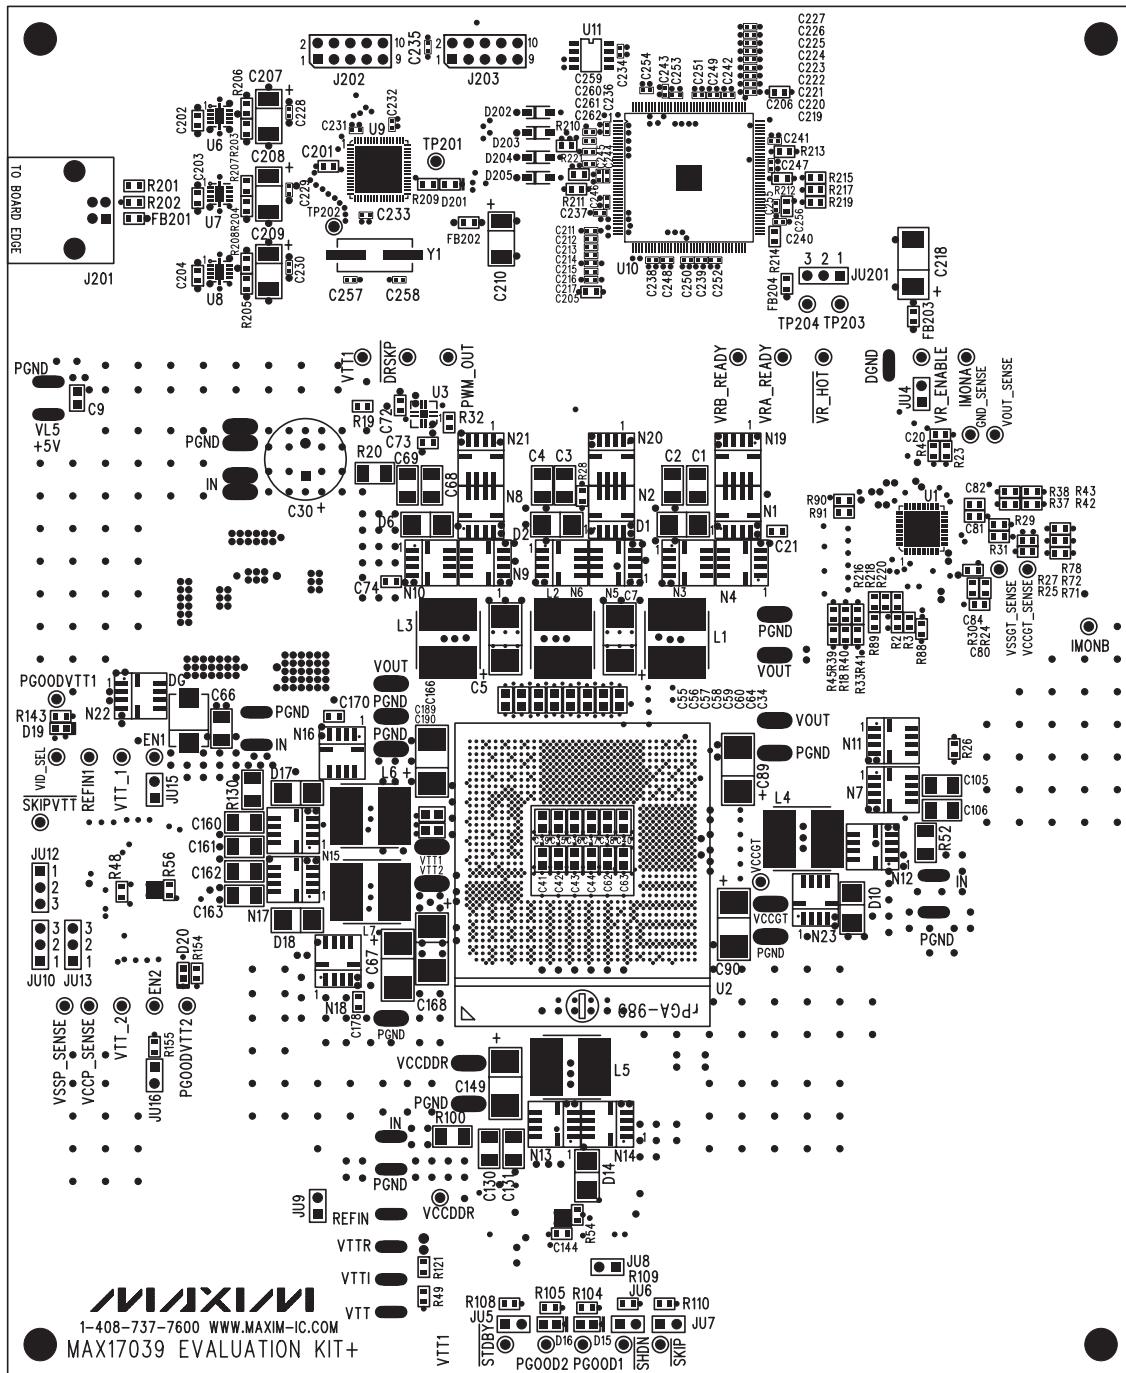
MAX17039 EV Kit Component Placement Guide—Component Side
